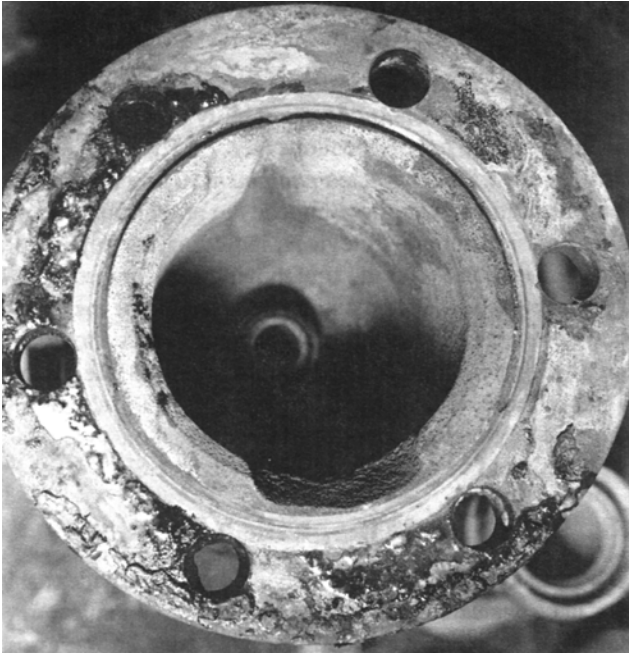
Acid Corrosion in Carbon Steel Bonnet Caused by Leaking Seating Surfaces
